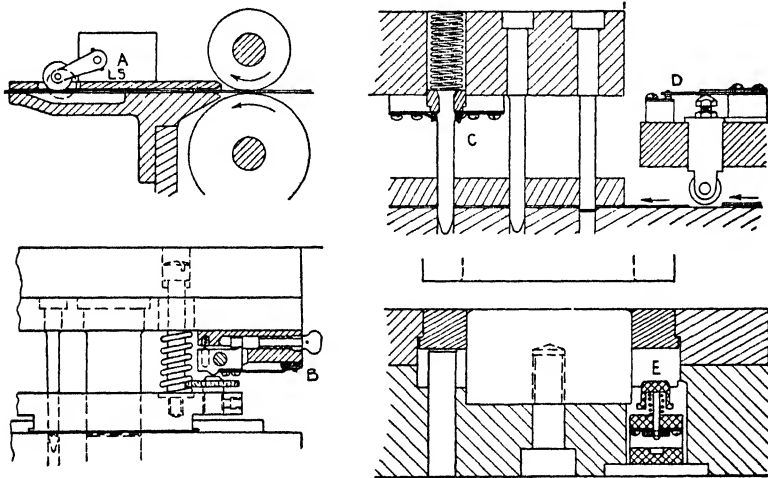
Emergency circuit opening devices for: (A) strip end or strip buckle, (B) checking metal thickness under a spring stripper, (C) pilot hole registry, (D) double strip detection, (E) double-action die protection.
